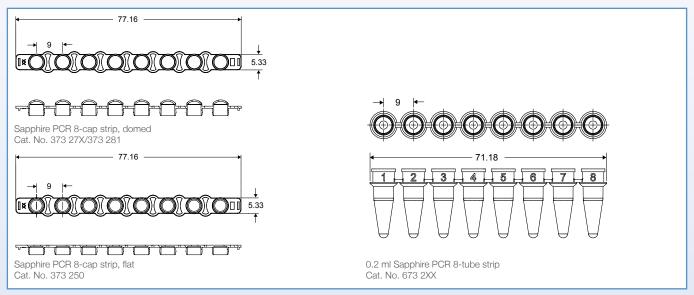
Dimensions of the Sapphire PCR 8-cap strips and 8-tube strips
